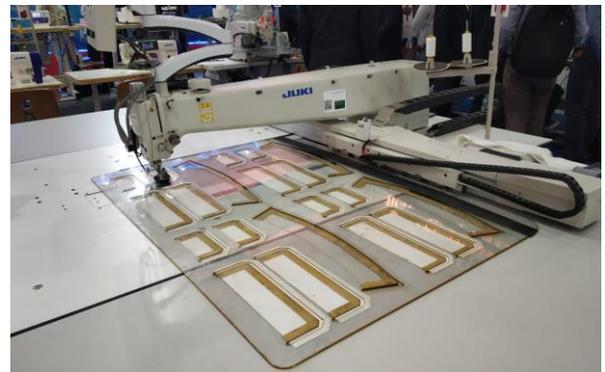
Sewing jig for shirt sleeve and cuff manufacturing
